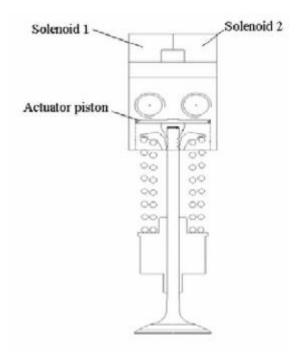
Sketch of the Pneumatic Valve Actuator [6]
